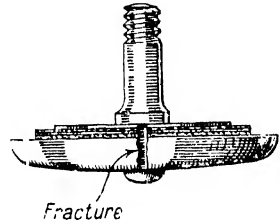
CAST-IRON MUDHOLE DOOR FRACTURED ACROSS STUD HOLE DUE TO EXCESSIVE TIGHTENING OR UNQUAL BEDDING OF JOINT
